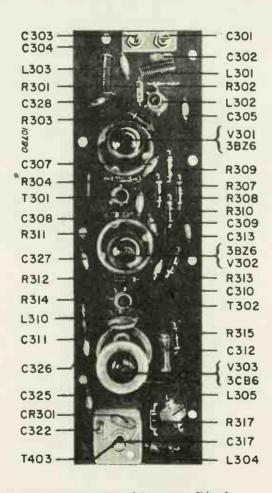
View of Component Side of Printed Wiring IF Board A5775-1.
